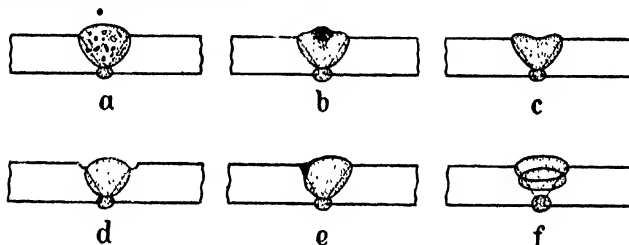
POSSIBLE DEFECTS IN BUTT WELDS
